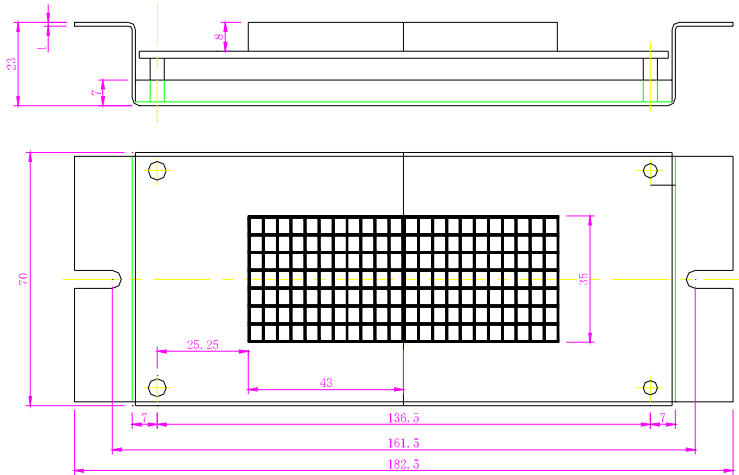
Mounting Dimensions of SM-04-HSC
